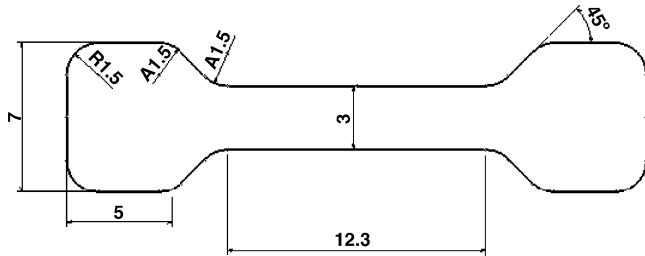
Schematic diagram showing the dimensions of the cylindrical tensile test samples (mm).
